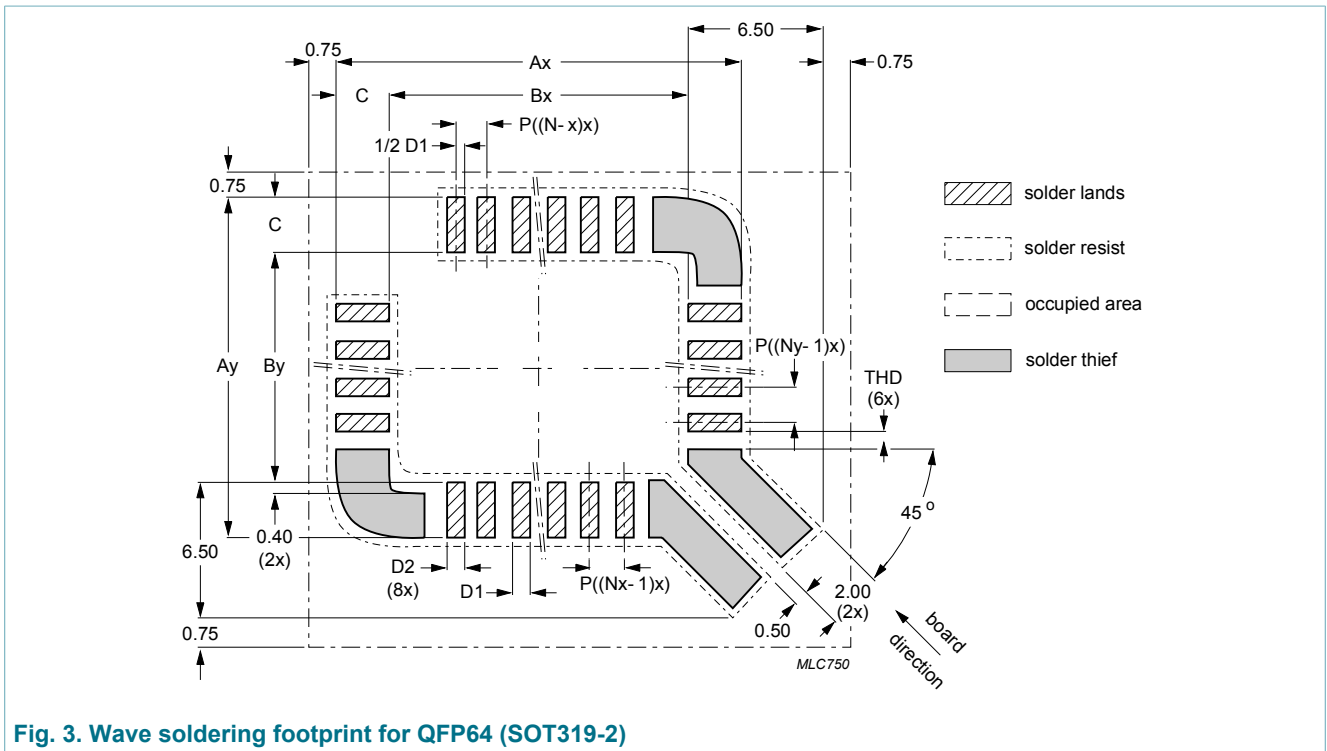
Wave soldering footprint for QFP64 (SOT319-2)
